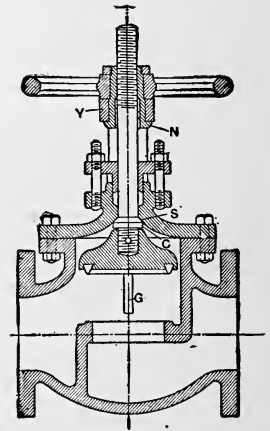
A Typical Globe Valve, Bolt-top, Outside Screw.
